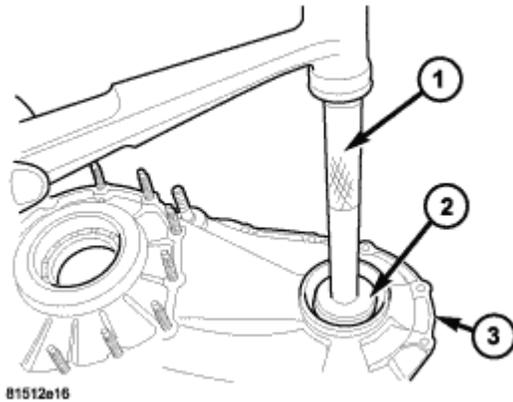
Installing New Input Gear Bearing Into Front Case Using Installer 8152, Inverted, And Handle C-4171
